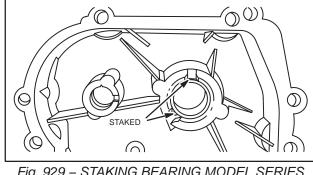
STAKING BEARING MODEL SERIES 6BH, 8BH, 60000, 80000, 90000, 100200, 100900, 110000, 120000, 130000, SUMP
